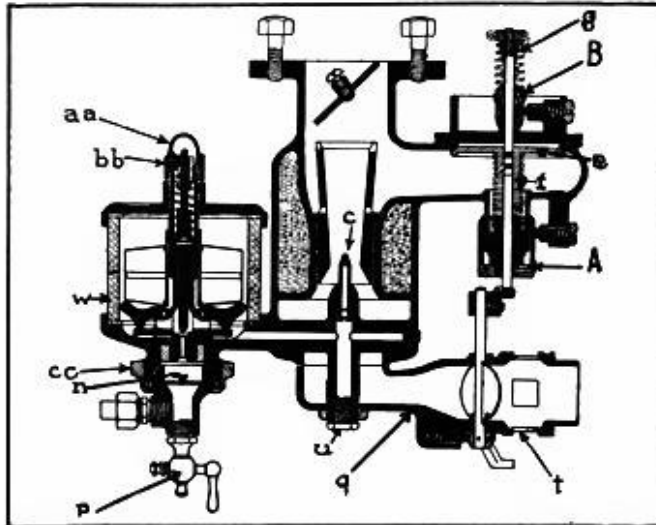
Sectional View of Type A Stromberg Carburetor Showing Low Speed Adjusting Nut A and High Speed Adjusting Nut B—Type B Is Similar, Being Adjusted in the Same Manner.
